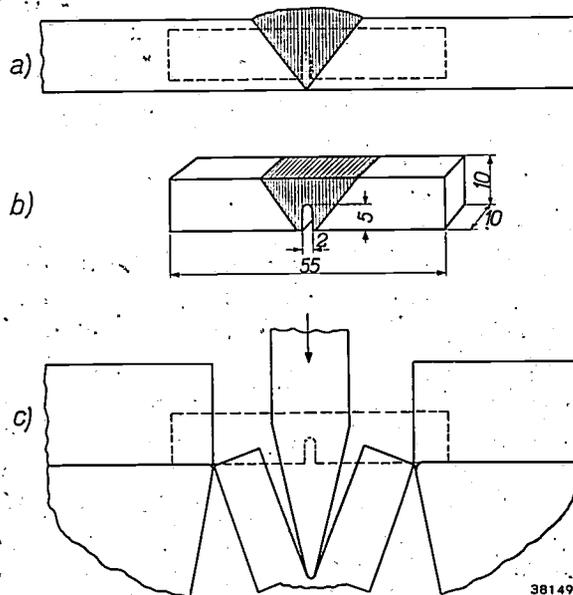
The way in which the test pieces (b) are made for the impact test (c) from a weld (a). The deposited weld metal is shaded.
